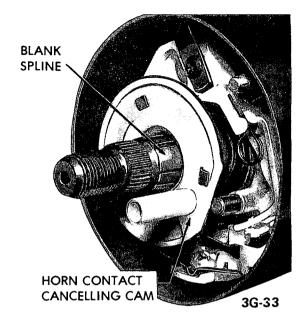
G-99 - Horn Contact - Cancelling Cam Installed
